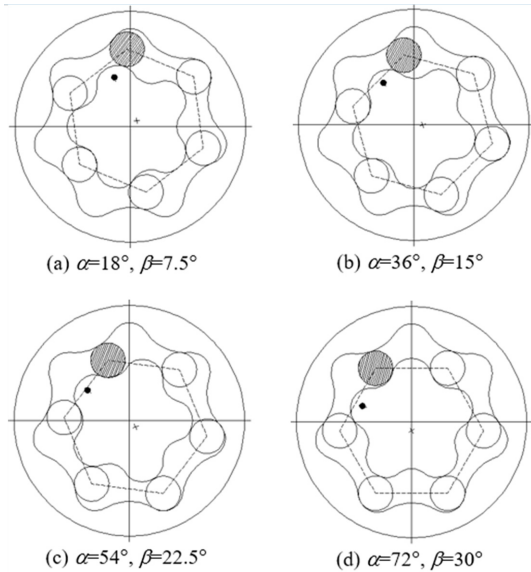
Operation of a pin-type double gerotor: (α -rotation of inner rotor, β -rotation of planet rotor).
